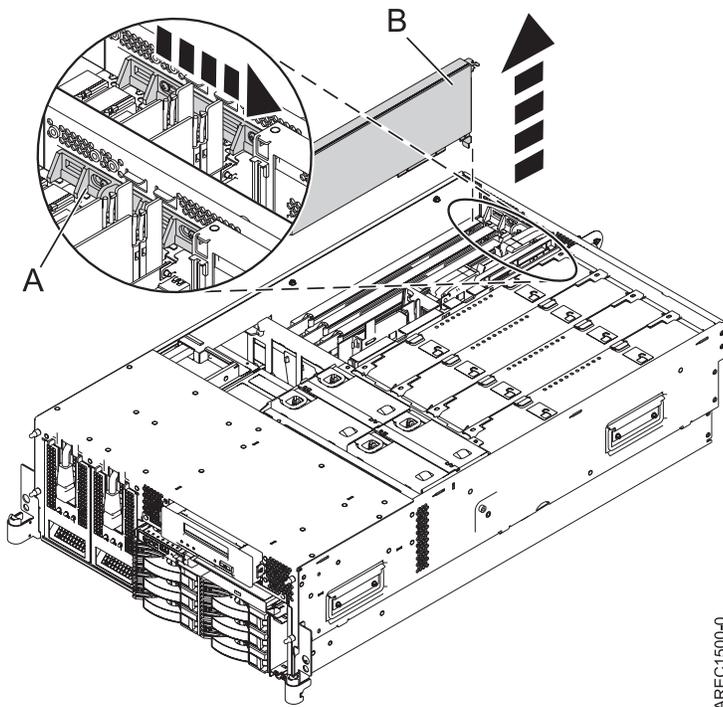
PCI adapter or filler plate removed from the rack-mounted system unit
